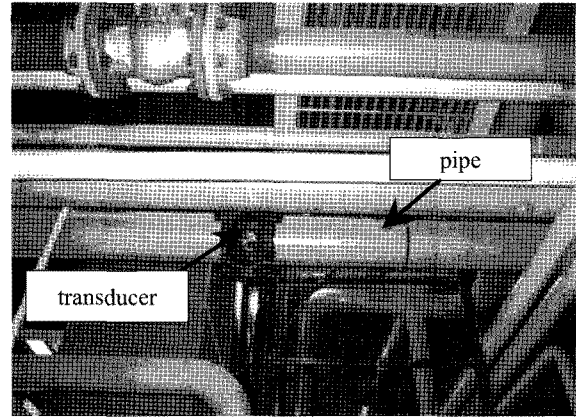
Guided wave test of outlet 152.4 mm pipe
